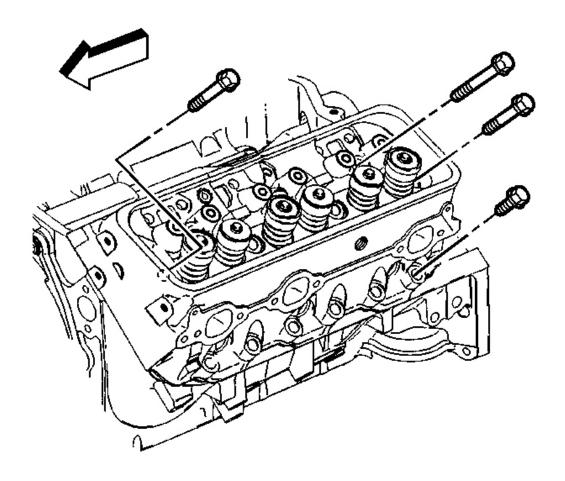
Locating Cylinder Head Bolts (Left) Courtesy of GENERAL MOTORS CORP.
